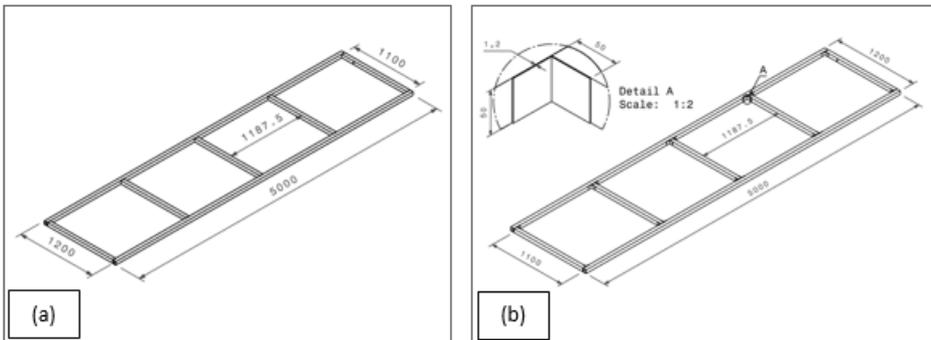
Detail dimension for (a) thin-walled chassis and (b) thin-walled chassis with gusset plate
